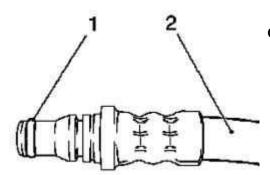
O-ring discharge line: 1 - O-ring, 2 - flow line
